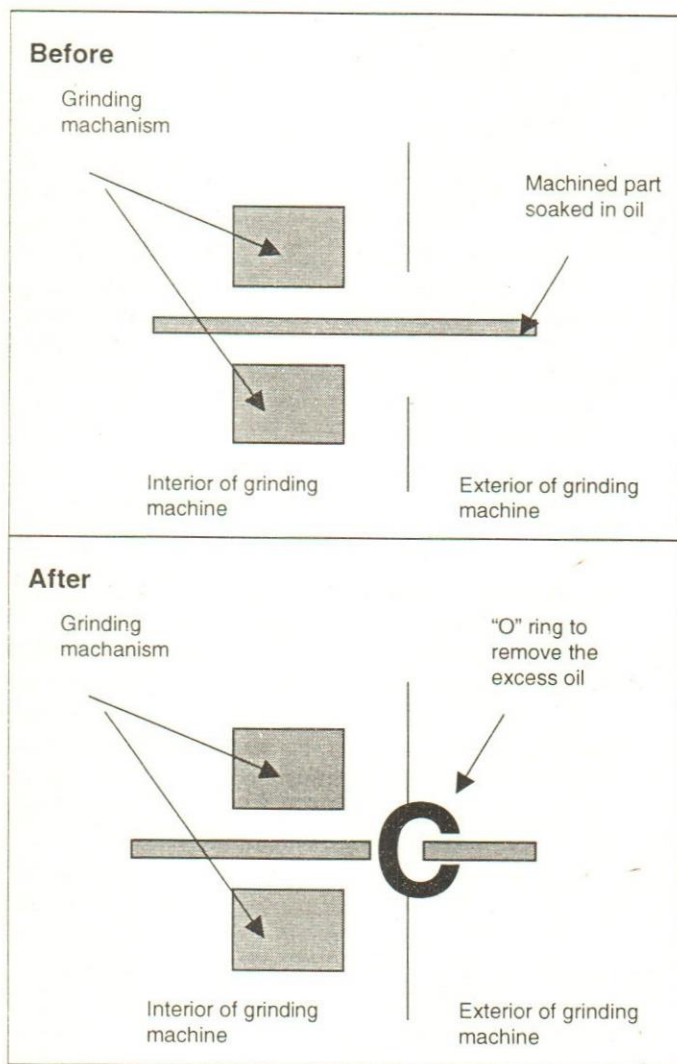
Schematic diagram showing improvement to grinding machine to remove excess oil from machined parts.
